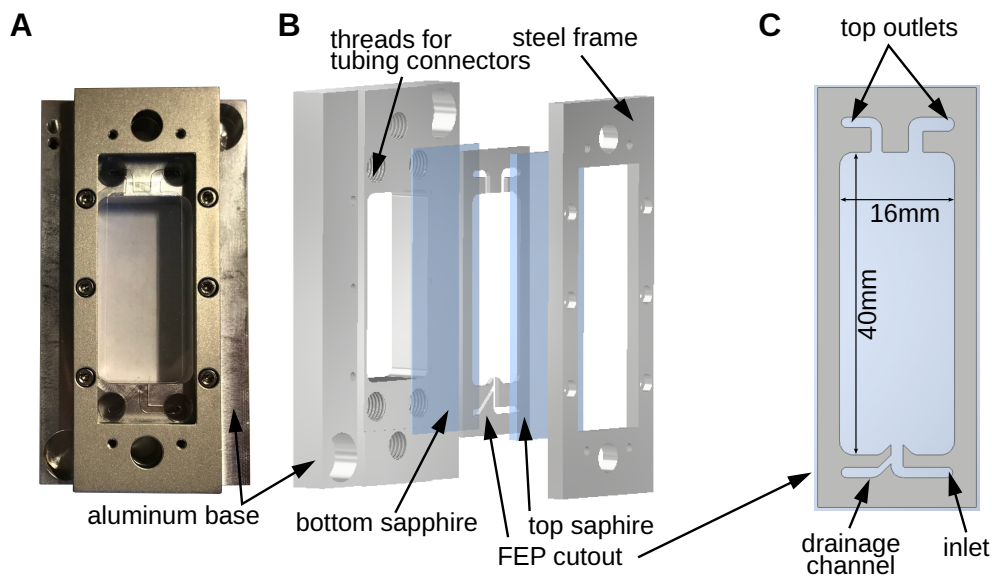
Assembly of the microfluidic flow-cell. Top view (A) and explosion scheme (B) show the steel frame that is screwed onto an aluminium base to press together the chamber assembly. This is formed by a two-dimensional cutout from an FEP-sheet (C) that is sandwiched between two sapphire plates. The cutout forms a rectangular chamber with 4 channels connecting to it. Four holes in the bottom sapphire overlap with the end of the channels in the cutout as well as the threaded holes in the aluminium base to allow microfluidic access to the chamber by connecting tubings with corresponding screw connectors. Figure reprinted with permission from [60].
